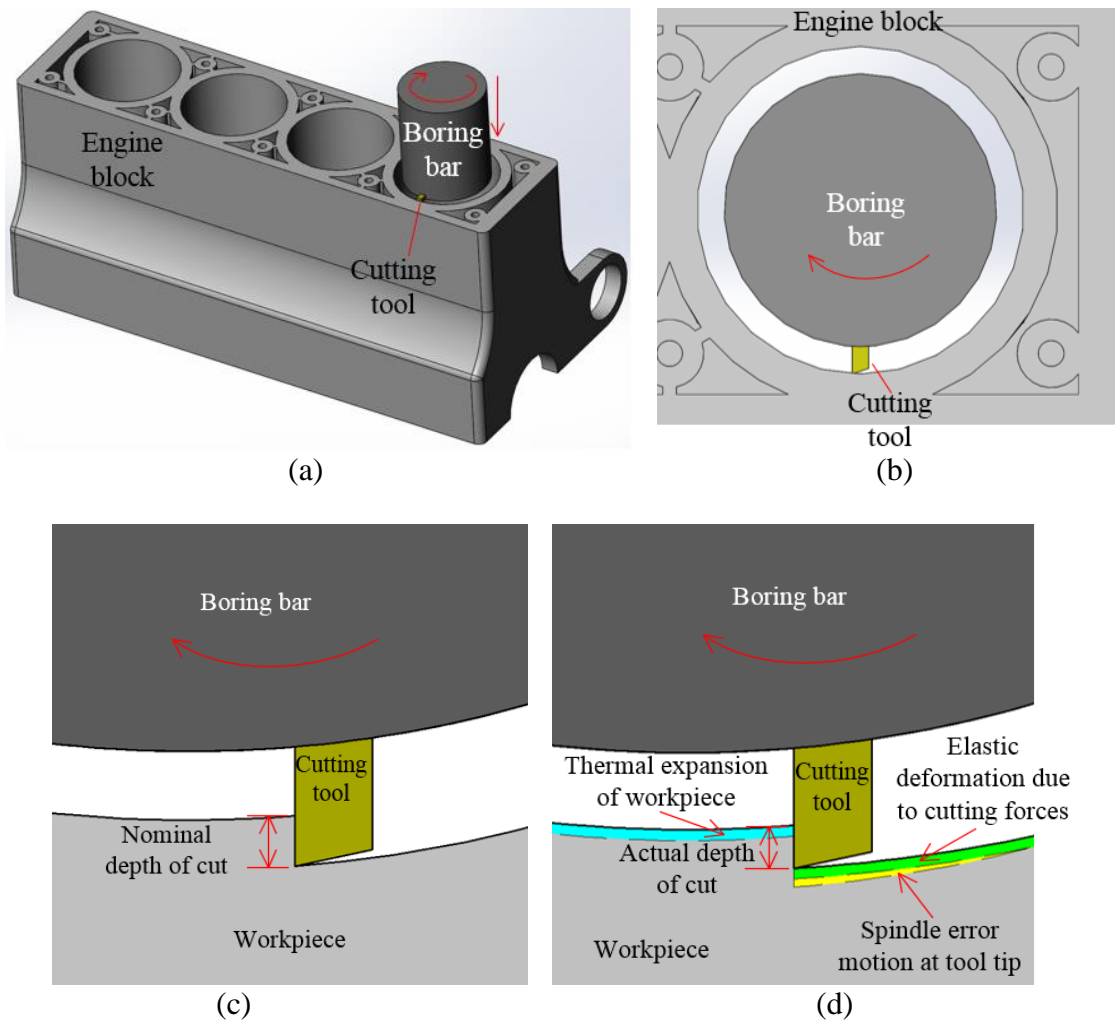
Finish cylinder boring process: (a) overview for boring a four cylinder engine block, (b) top view of the workpiece, boring bar, and cutting tool, and close-up views of (c) the nominal depth of cut, and (d) the actual depth of cut.
